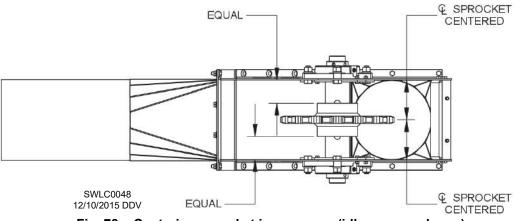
Centering sprocket in conveyor (idler corner shown)
